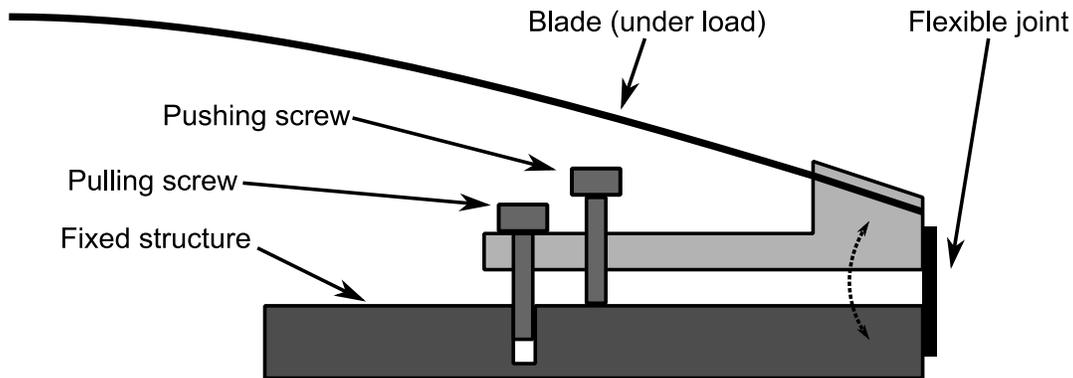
Sketch of the blade adjusting mechanism. The pull and pushing screws force the flexible joint to bend, thus modifying angle of the blade.
